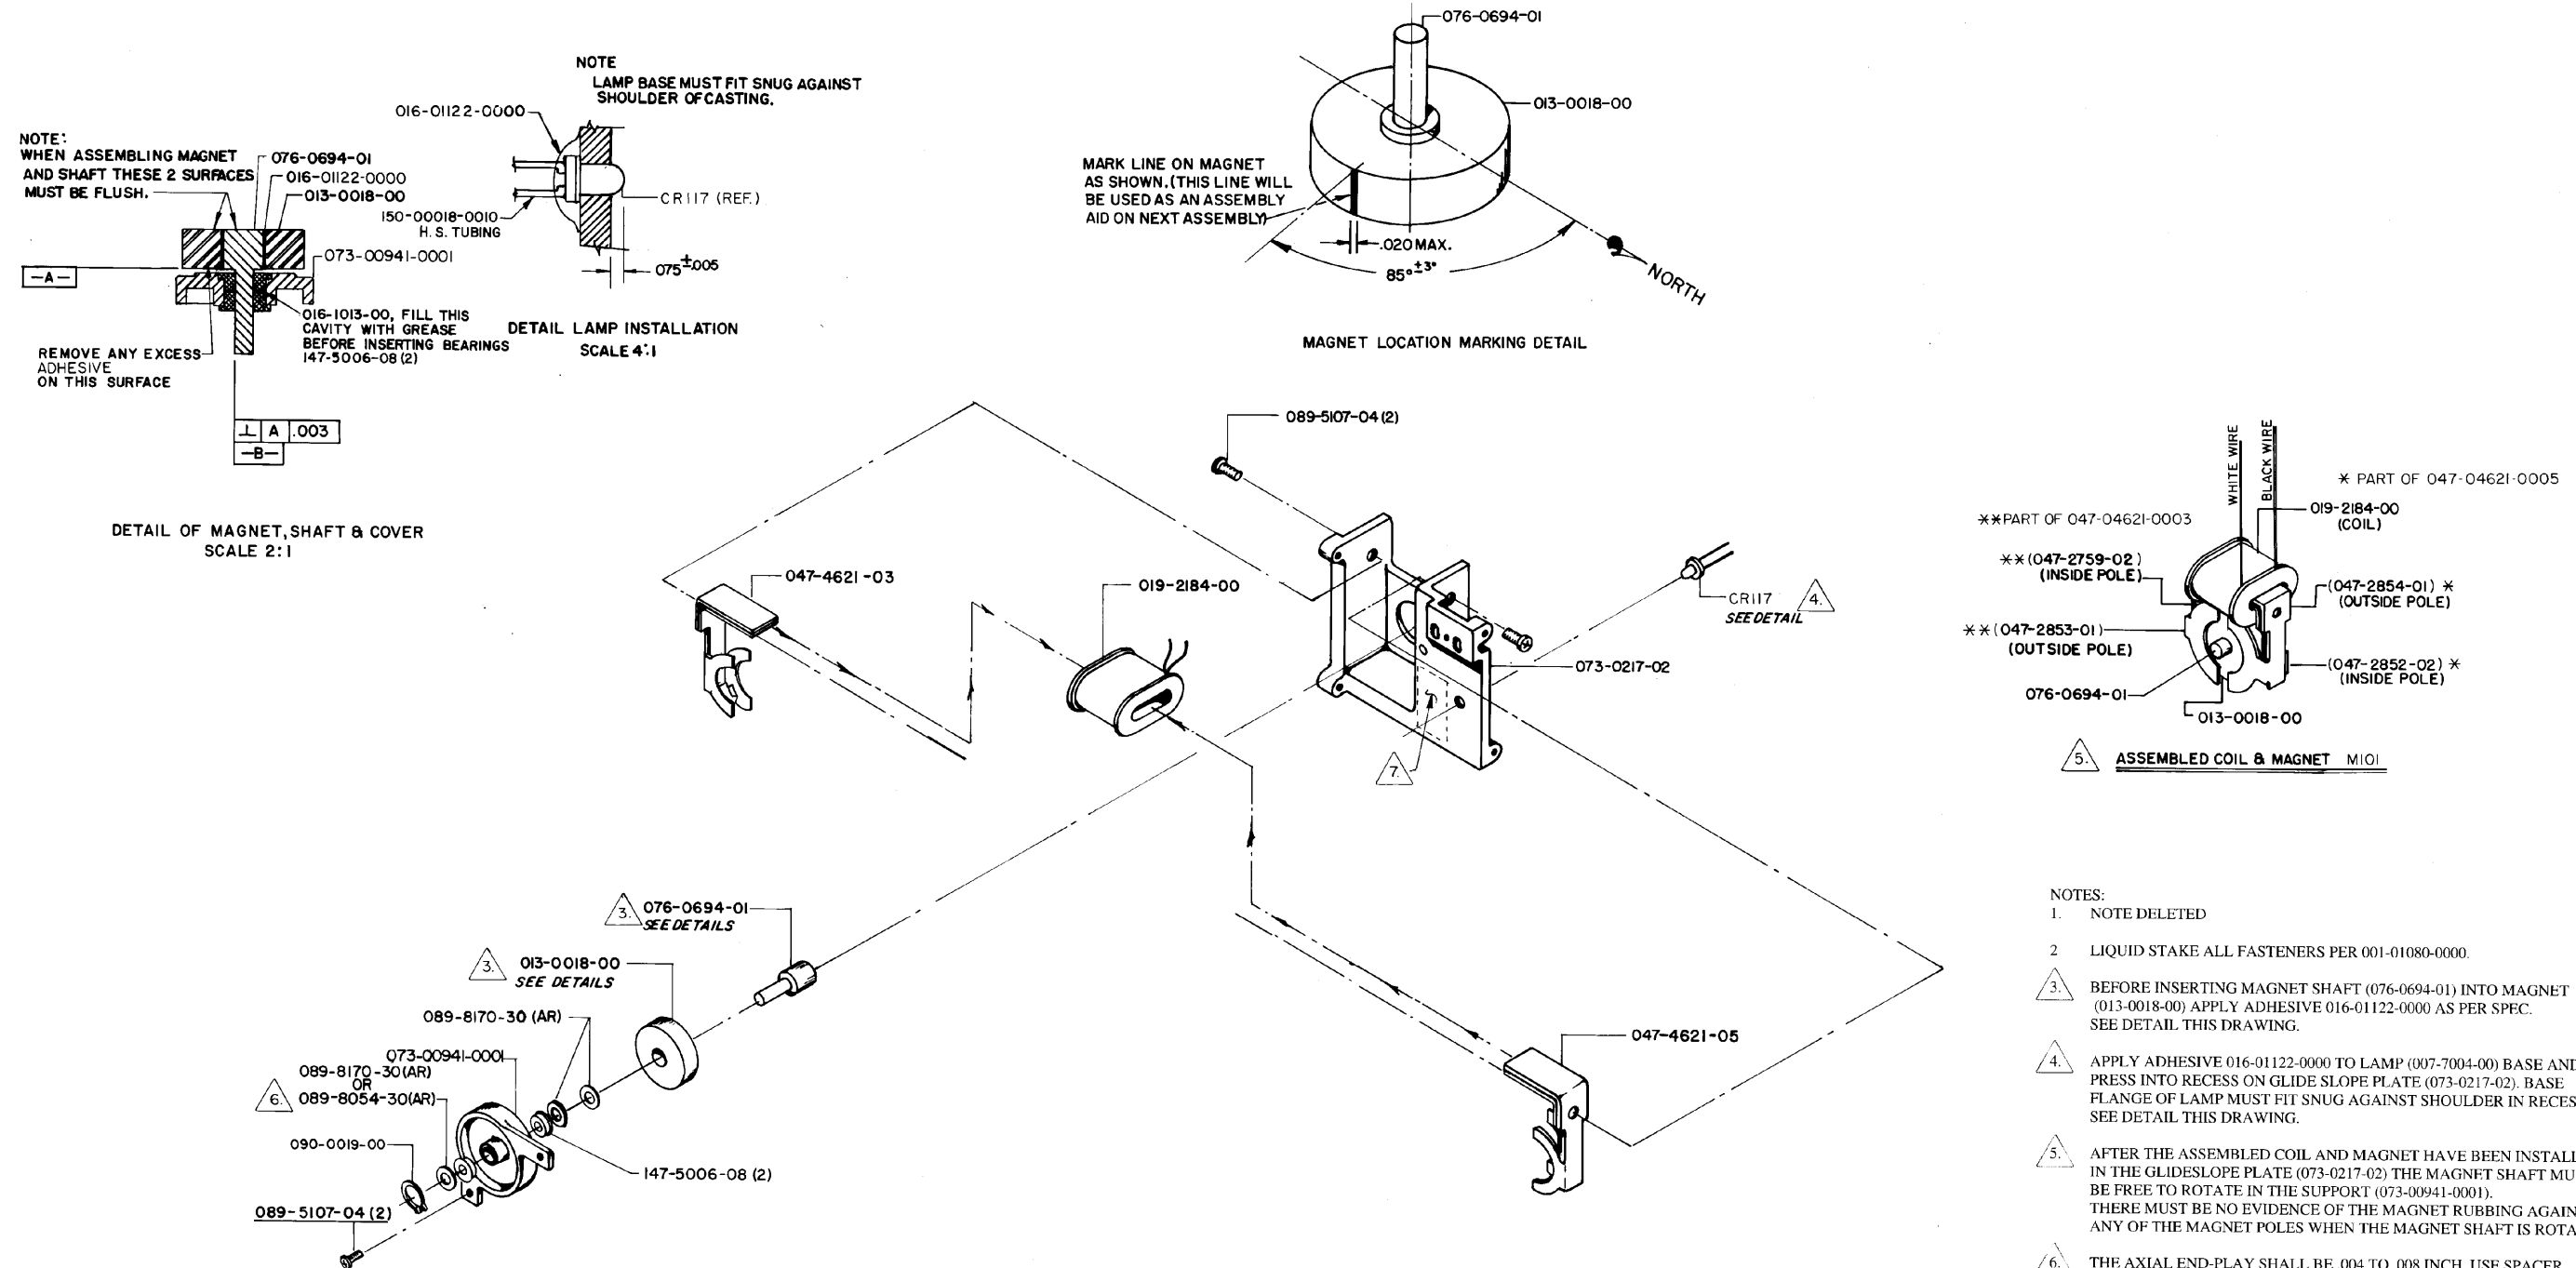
KI 525A LAMP BOARD ASSEMBLY
